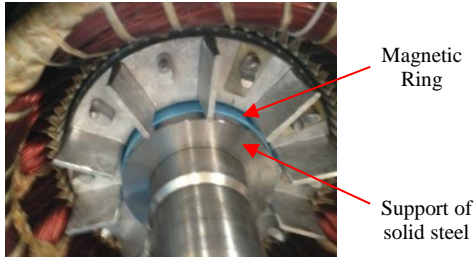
Mounting of the magnetic ring on the 110 kW machine shaft. A support of solid steel is used to fix the magnetic ring on the shaft.
